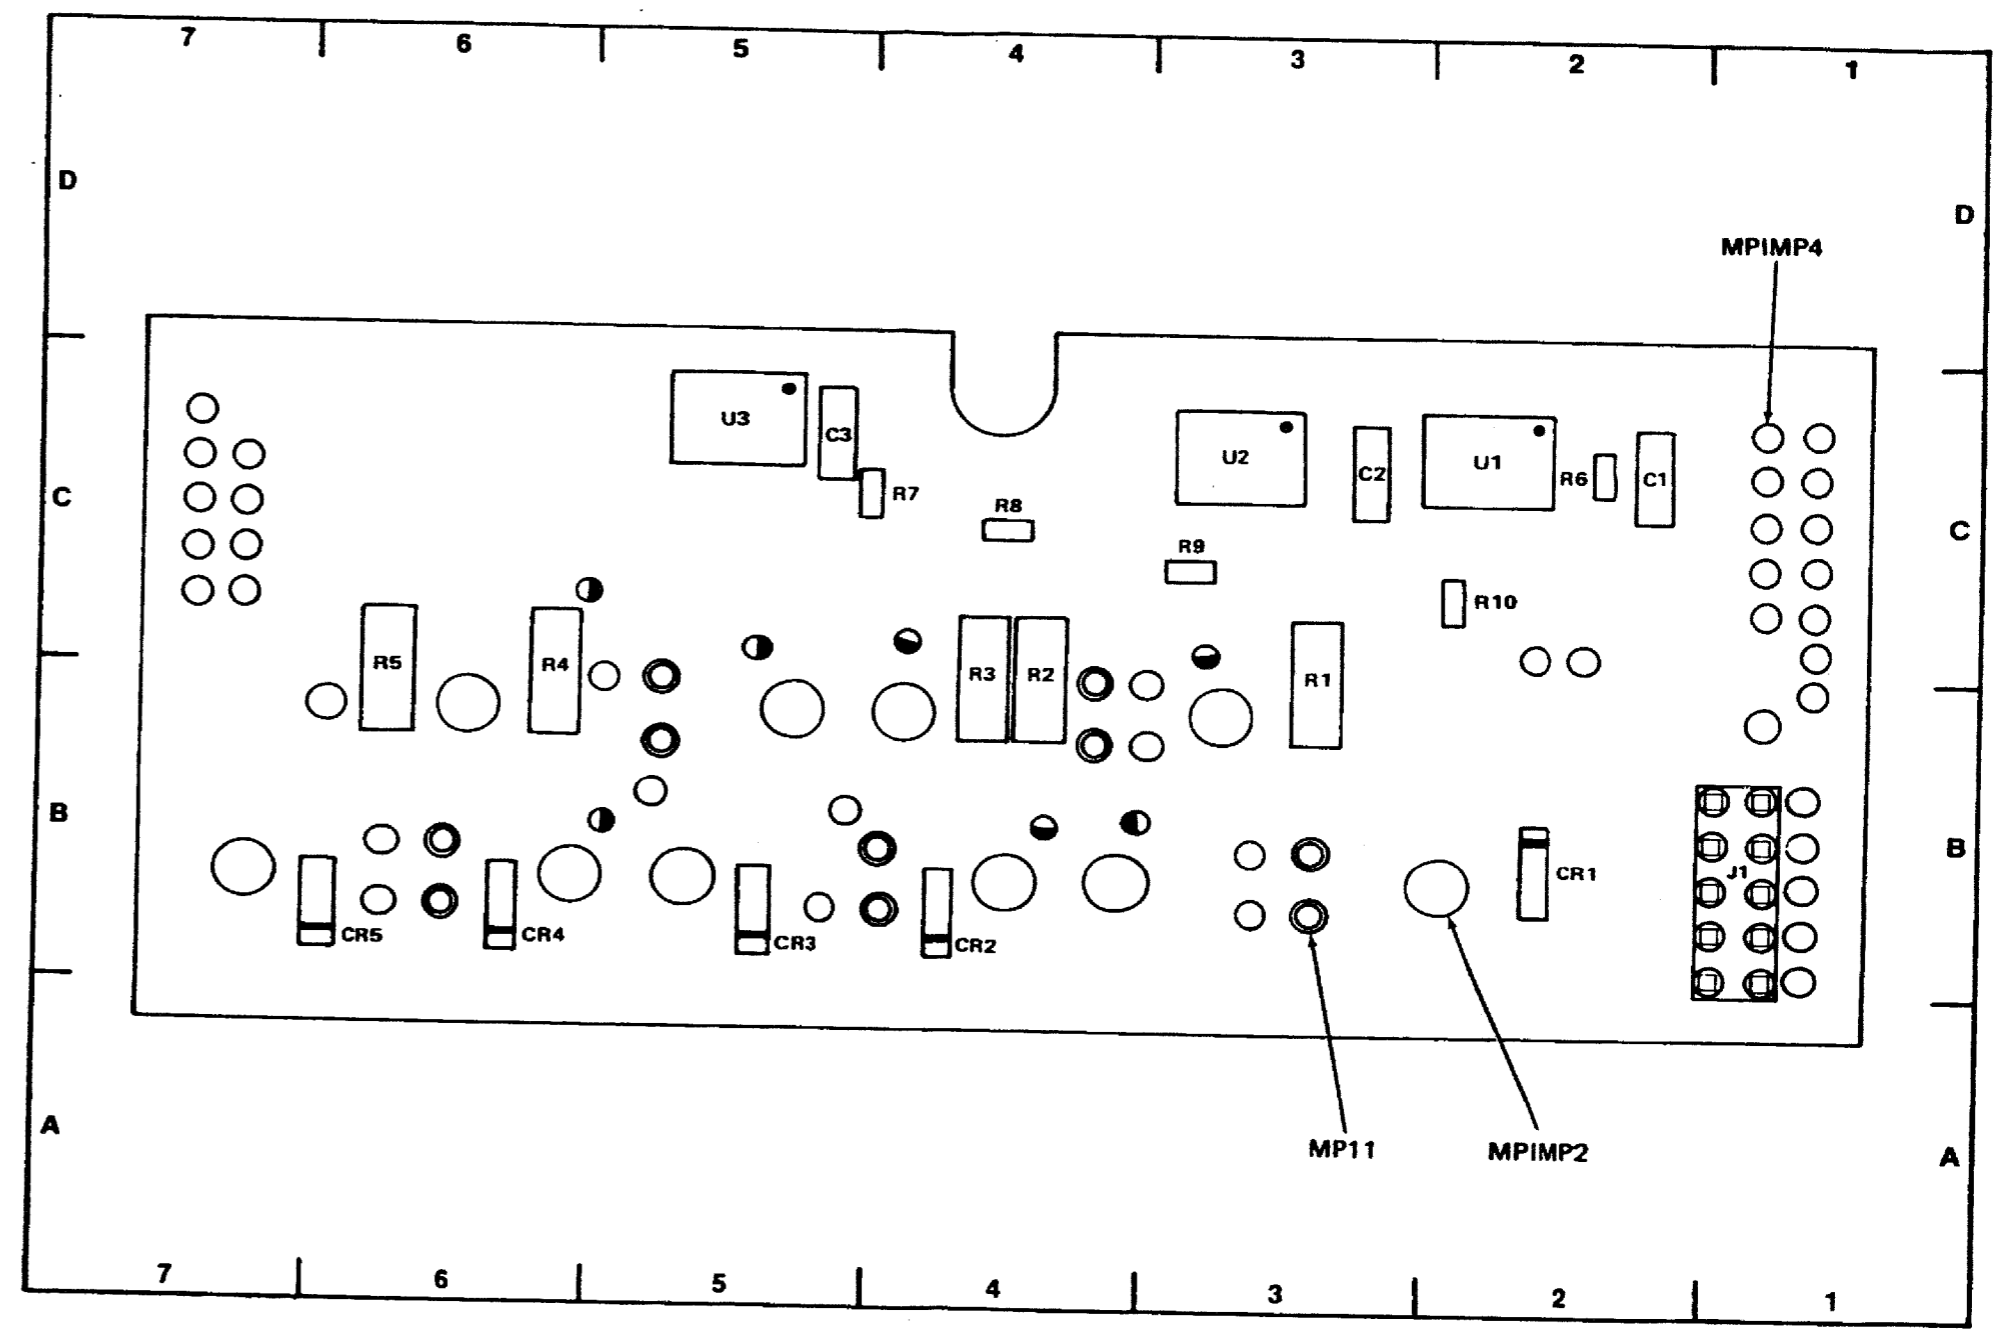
Line Feed Driver Circuit Card Assembly
